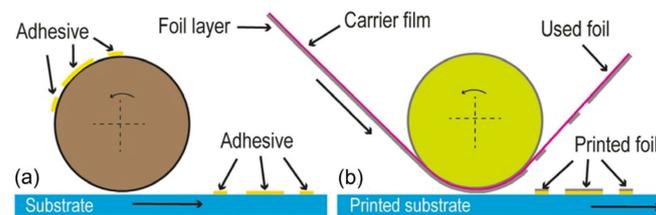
Principles of hot foil printing: (a) vertical hot foil printing machine; (b) roll-on hot foil printing machine [8].
